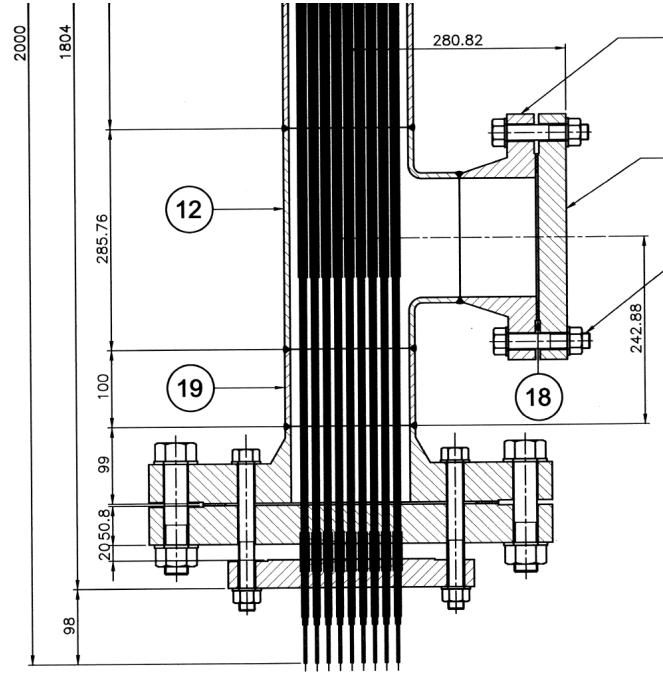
Drawing of Sealing Flange Sliding Pin Assembly
